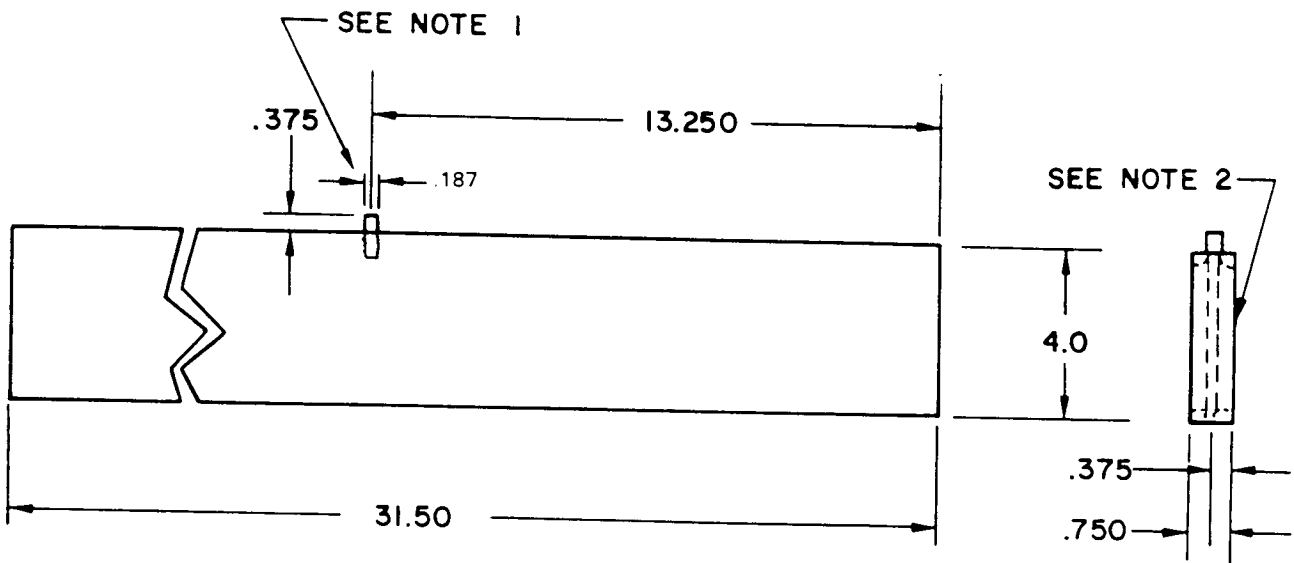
Fabricated Aileron and Flap Rigging Tool
